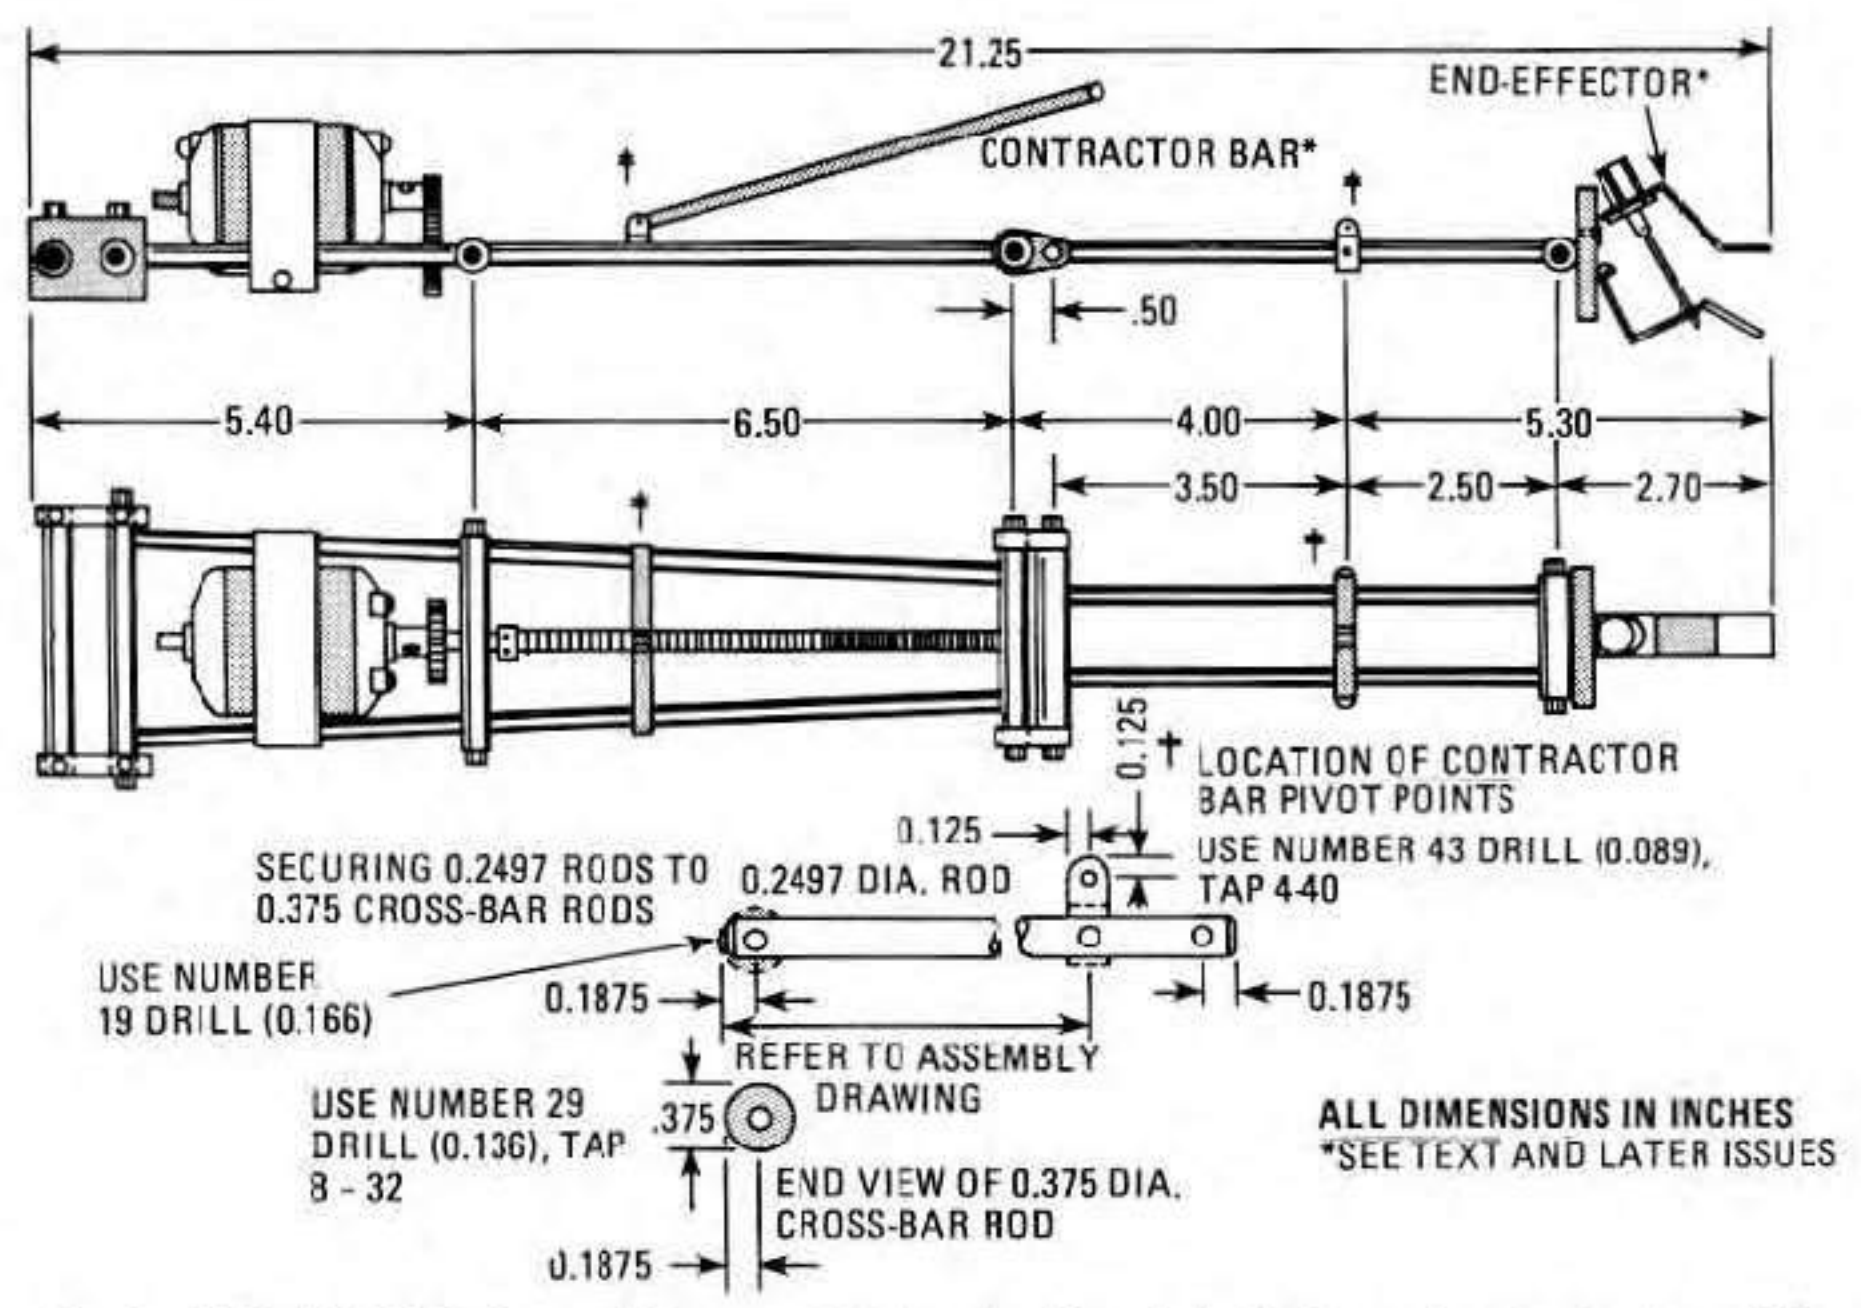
SIDE AND TOP views of the assembled manipulator. End-effector and contractor-bar will be covered in the next installment.
